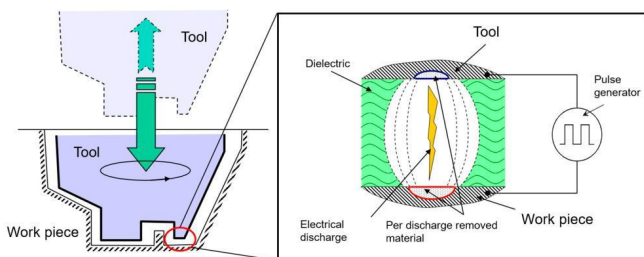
The electrode tool is lowered into the workpiece (left). In the small gap between tool and workpiece, a discharge occurs that removes material (right).[14]
